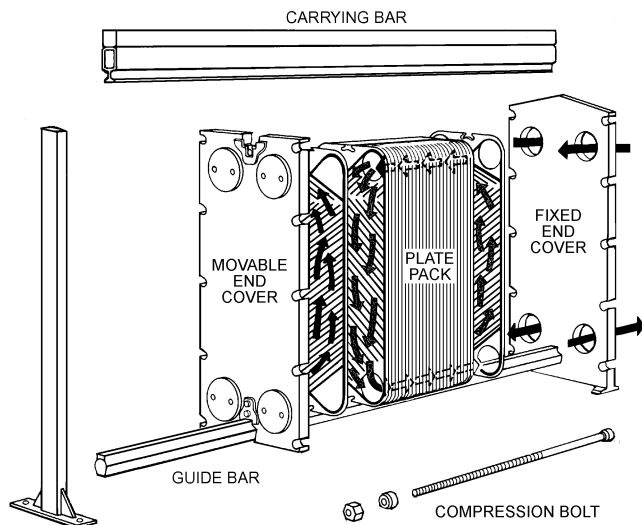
Components of a Gasketed Plate Heat Exchanger
